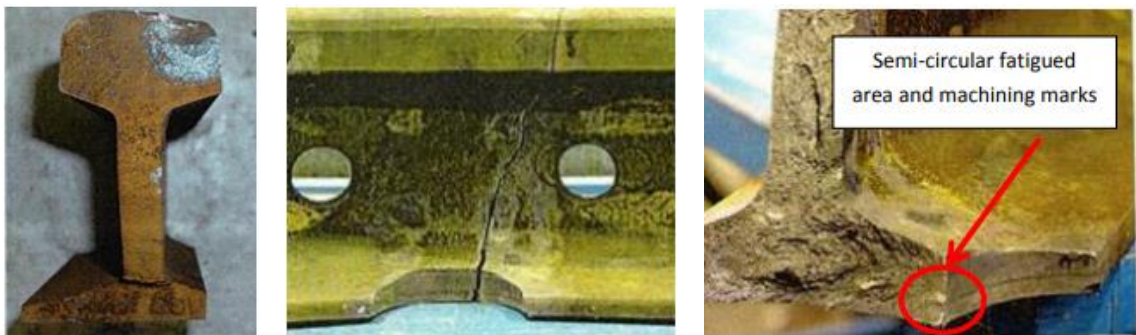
Showing (a) Weld-repair-related fatigue, (b) and (c) Defects are caused by fatigue from machining stress raisers [158].
